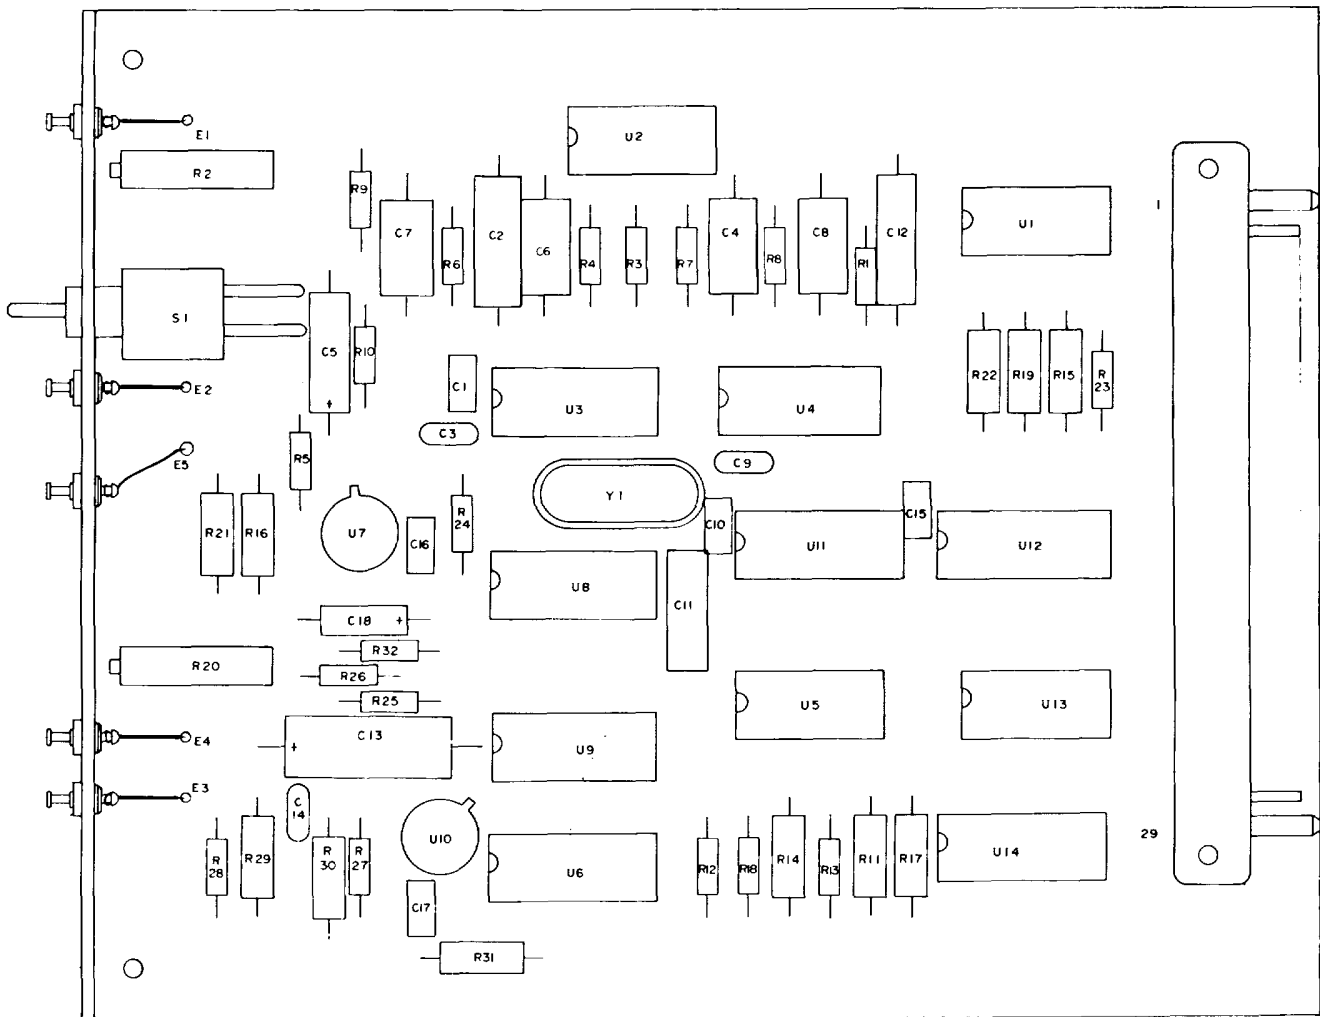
Reference and Subcarrier Circuit Card Assembly, 1A5A1 Parts Location Diagram
